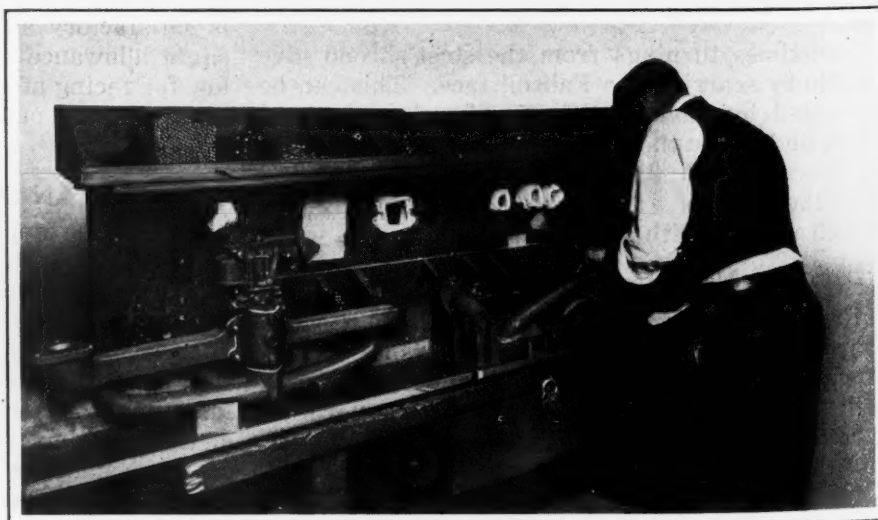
A Typical Sub-assembly Ready to be Fed into the Main Engine Line
